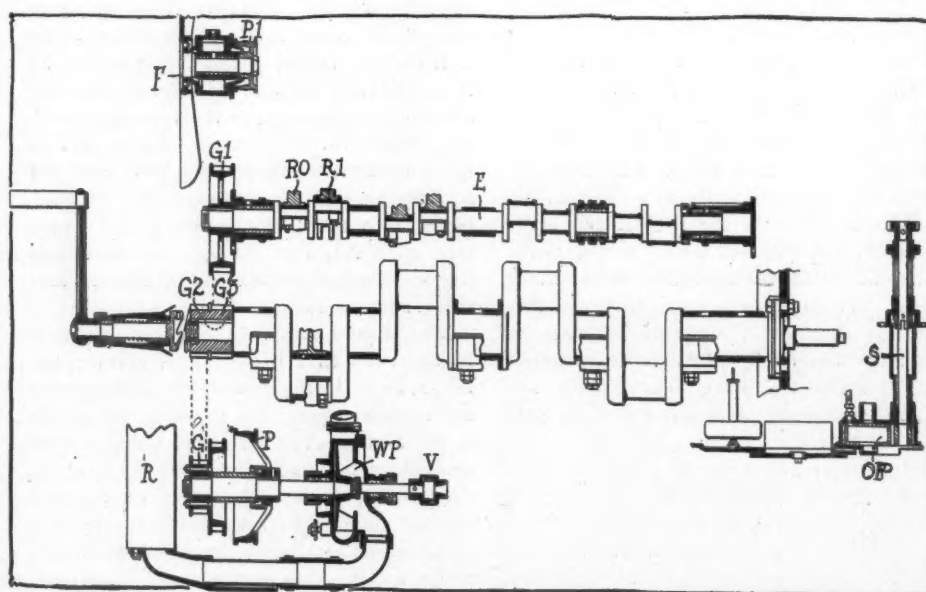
MOTOR DRIVE SHAFTS ON STEARNS-KNIGHT MOTOR
